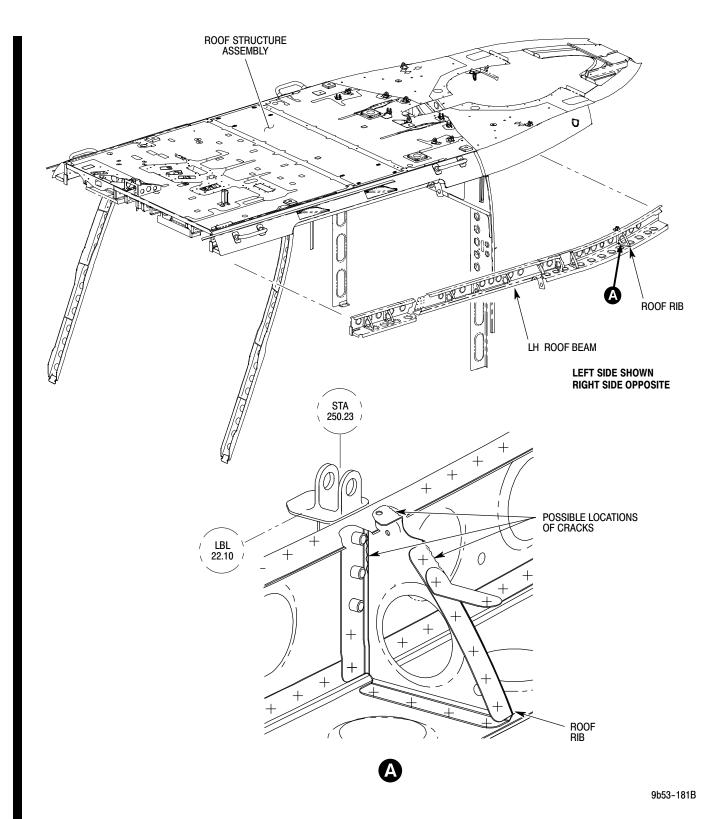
Location of Cracks in the Roof Rib Installation (Typical, Both Sides)
